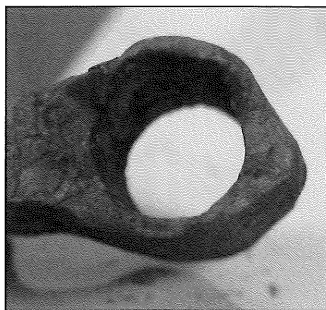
The welding blows were focused on the outside and inside scarfs
